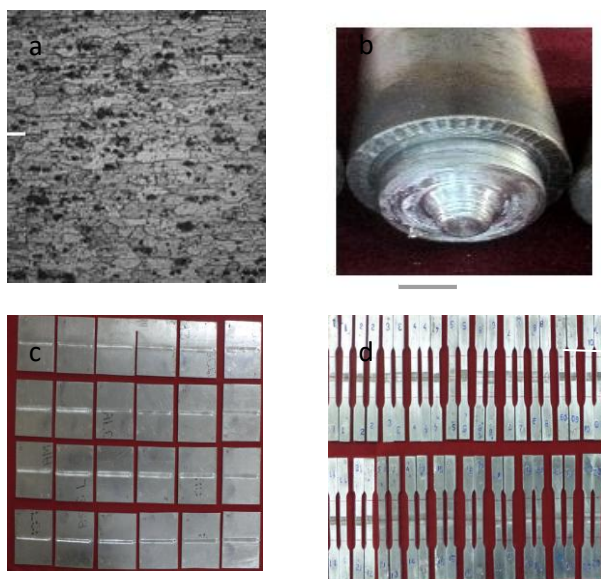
a) Optical micrograph of PM, b) Used FSW tool, Photograph of c) fabricated joints and d) Tensile specimens
